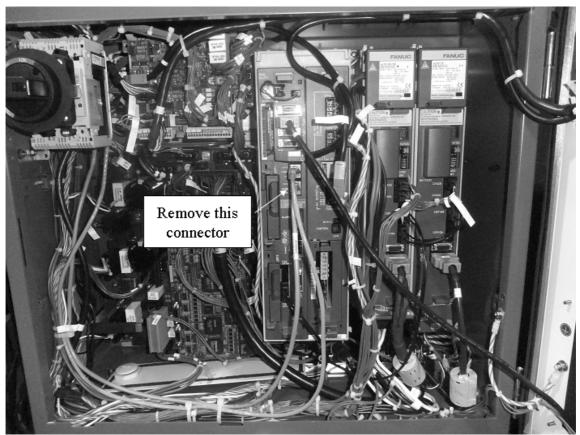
(a) Remove the connector of main board (R-30*i*B Controller A cabinet)
